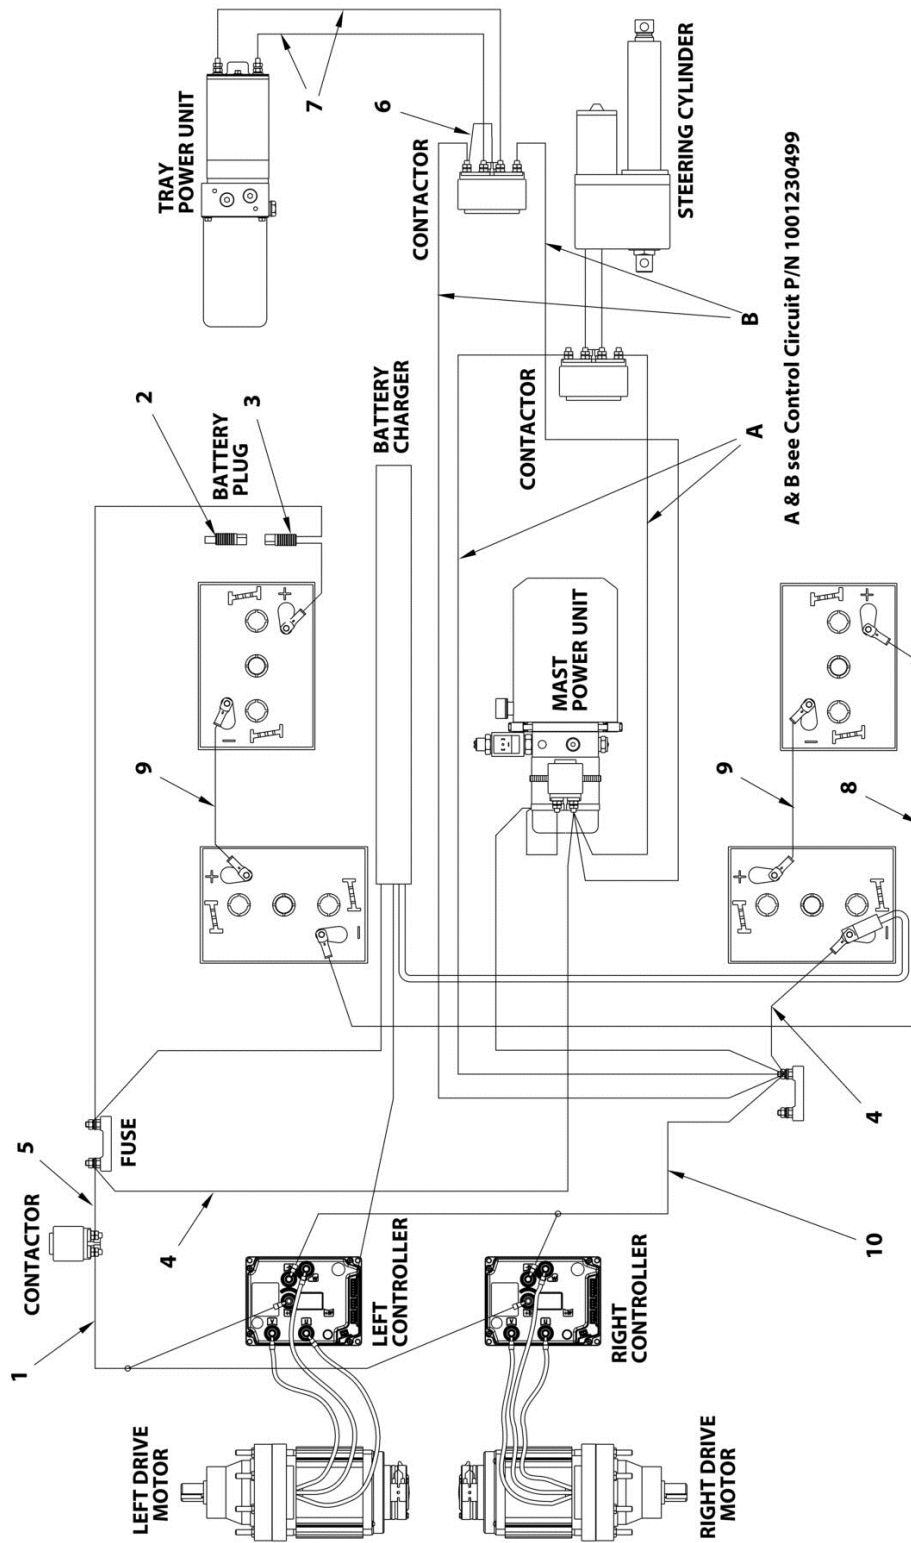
CABLES INSTALL / INSTALLATION CABLES
